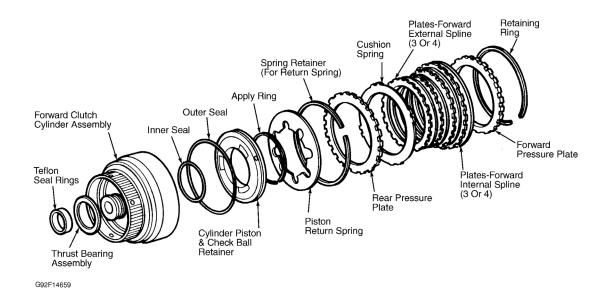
Exploded View Of Forward Clutch Courtesy of FORD MOTOR CO.
